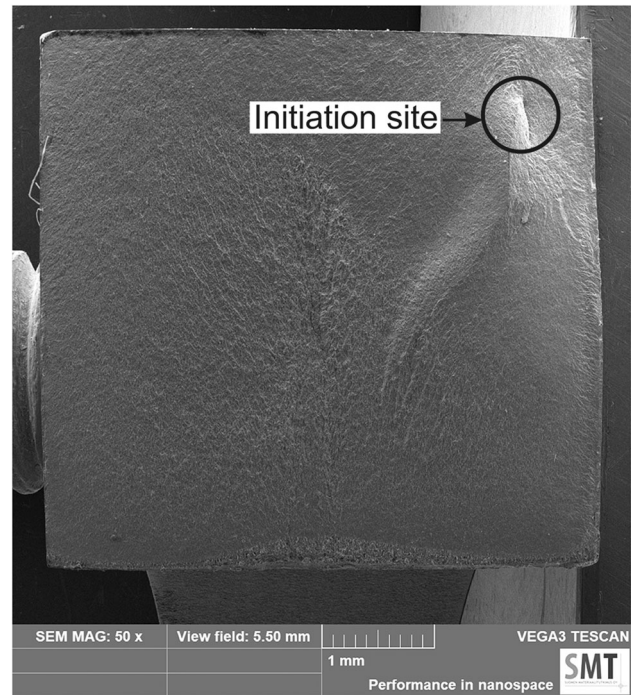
The fracture surface of a 500-HBW steel specimen exhibiting the initiation site of the final fracture and a completely flat fracture mode
